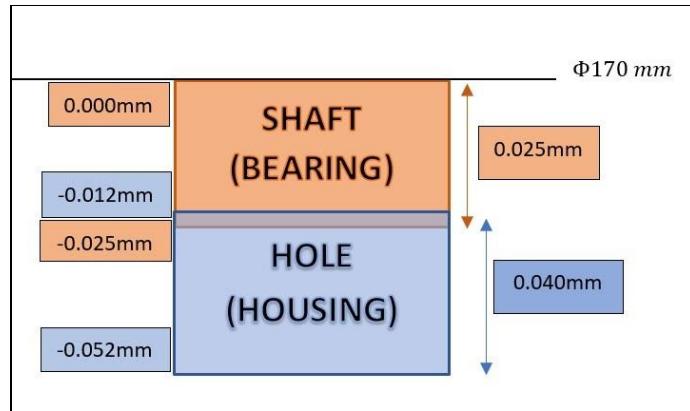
Selected Tolerance Fit Assembly for Bearing & Main Casing
